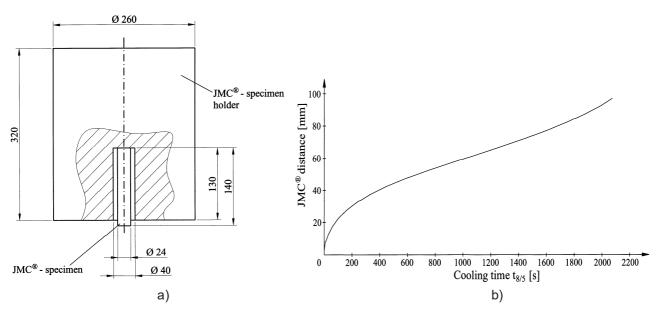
JMC®-specimen and JMC®-specimen holder, all dimensions in mm
